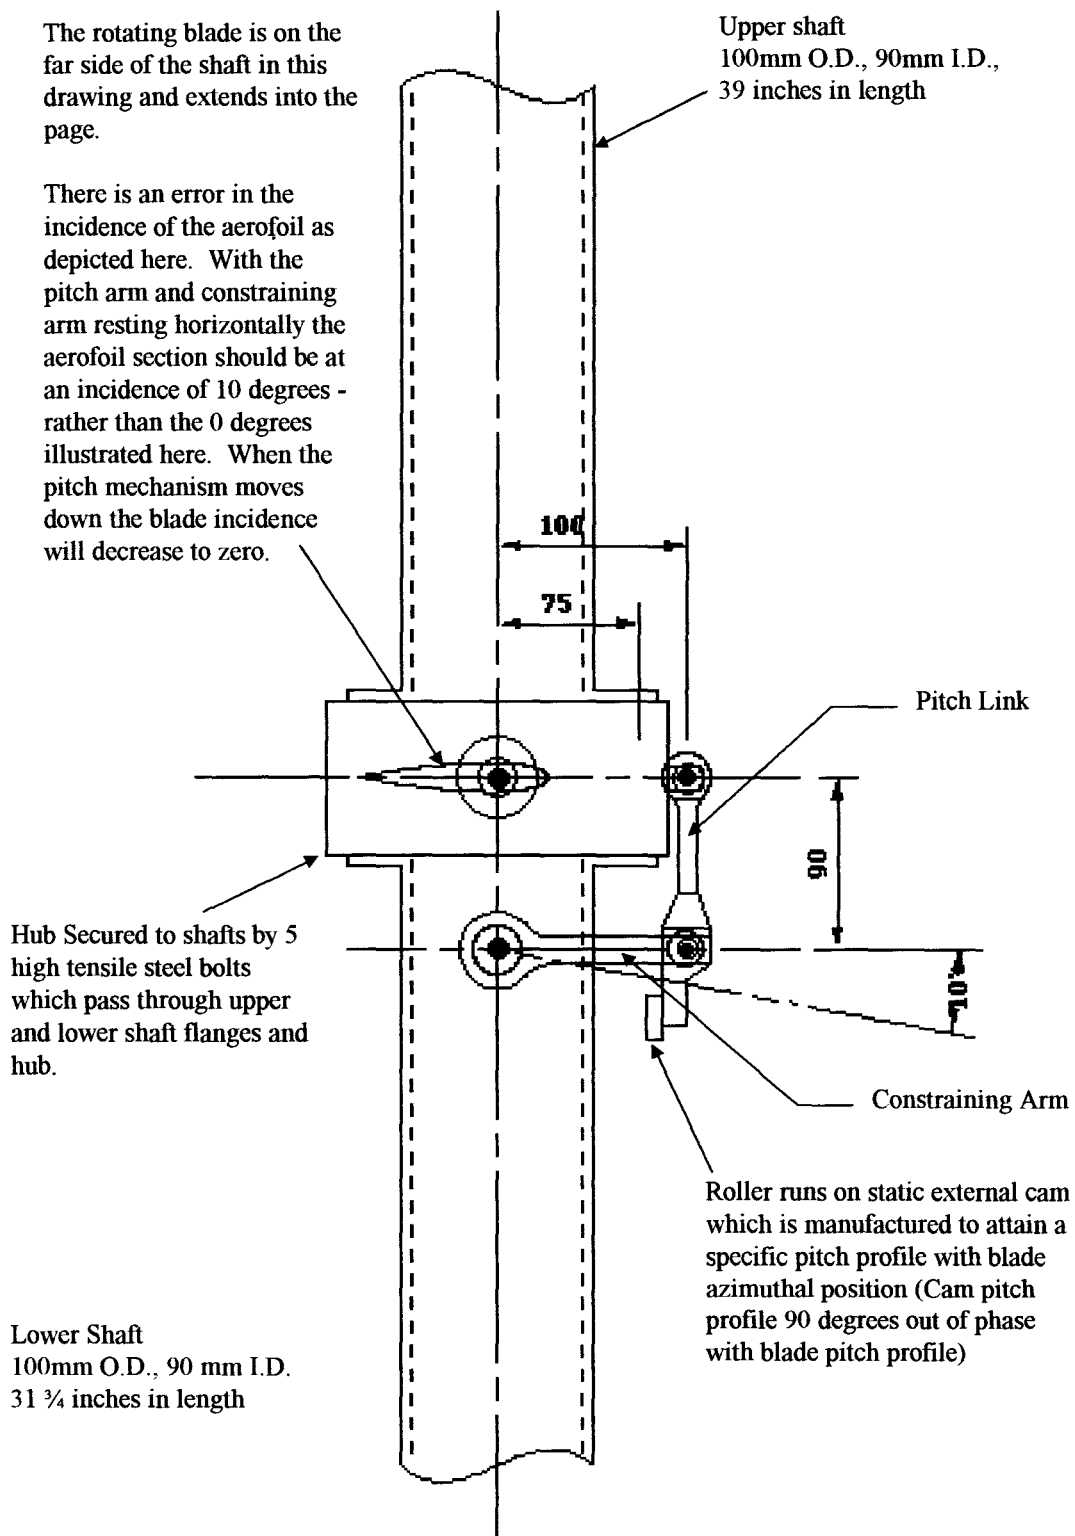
Construction drawing of hub, pitch mechanism and rotating shafts.
